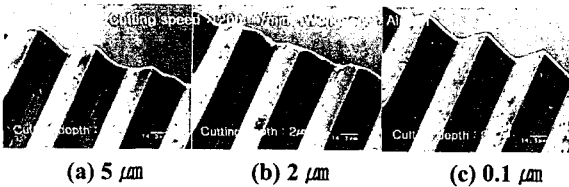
Prism pattern machined with different cutting depth(for Al6061)
